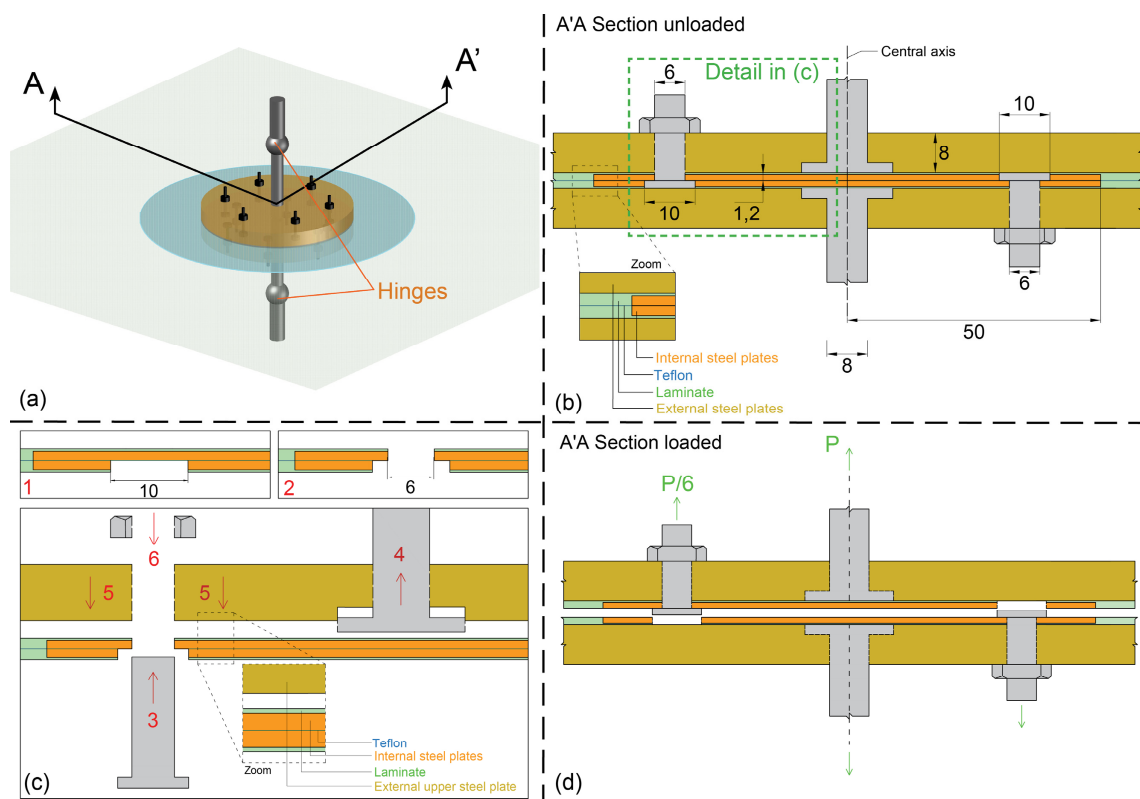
Assembling of loading system; (a) general view; (b) A'A section (unloaded/closed) view; (c) detailed description of assembling sequence; (d) A'A section (loaded/open). Dimensions in mm
